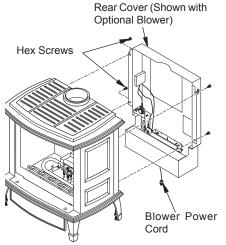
Installing Rear Cover (Shown with Optional Blower Accessory)
